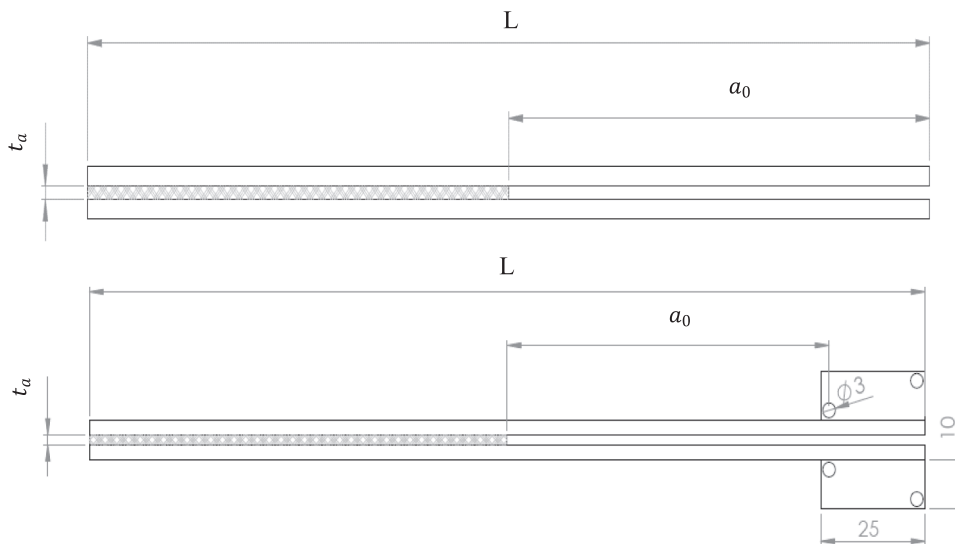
Specimen geometry, top: for RWD test, bottom: for DCB test including two blocks with holes to attach the specimen to the test machine. Only the two holes in the block closest to the adherends are used to make the block function as a hinge. The second hole is only there so the blocks can be re-used for another DCB test.
